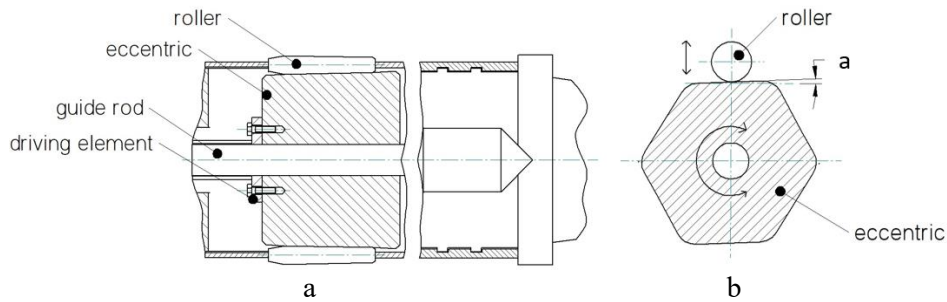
a) Hardening tool with depth adjustment of rollers via an eccentric
